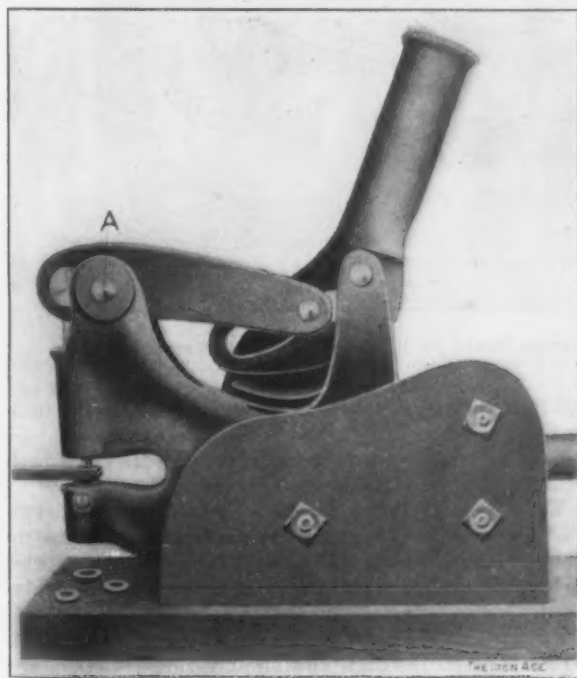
Detail of the Punch End in Open Position, Showing Also Manner of Mounting for Stationary Use.
